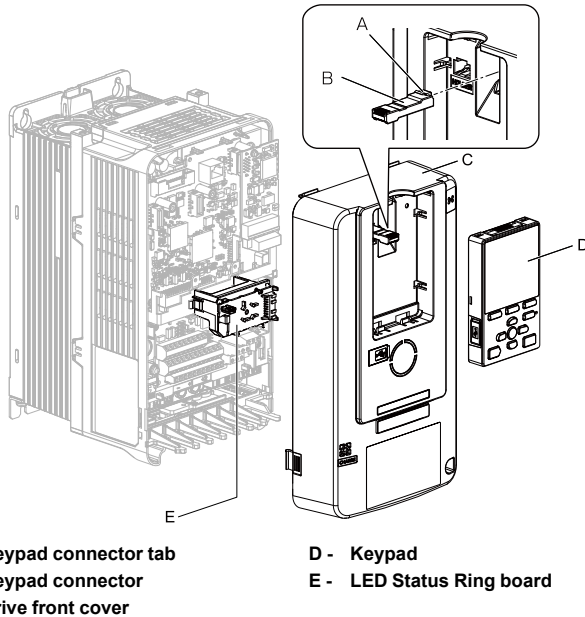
Install the LED Status Ring board, Front Cover, and Keypad
